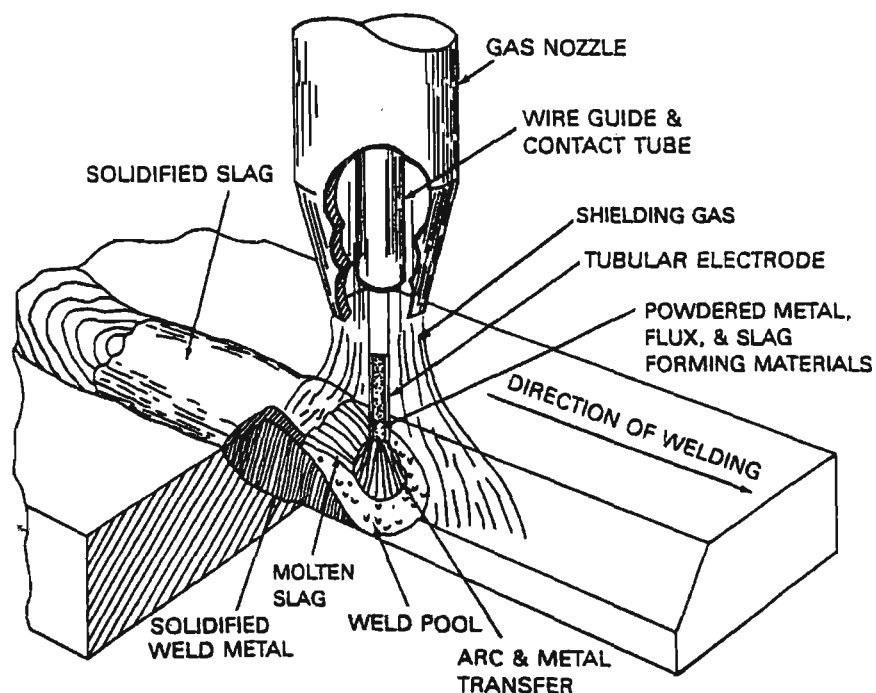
(b): Gas shielded flux cored arc welding (After Welding Handbook 1991).
